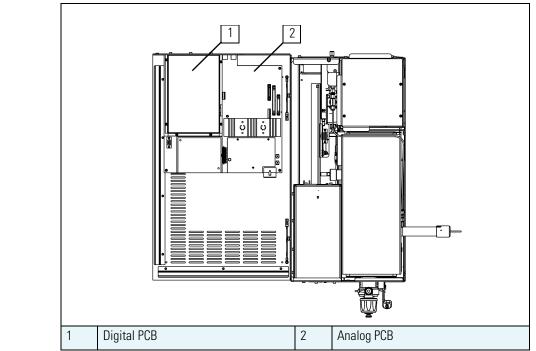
Replaceable Parts (Left Side Panel, Top)
